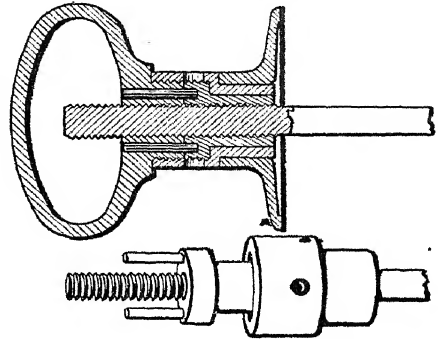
Knob-Holding Device, Adjusted by a Thread.
